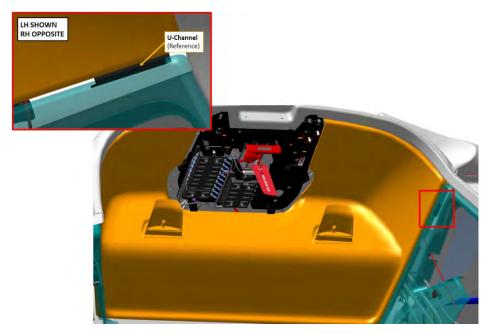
BAGGAGE SIDEWALL PANEL REMOVAL
